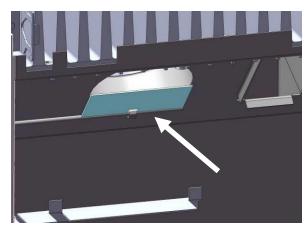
Restrictor Fully Closed Detail (baffle removed for clarity)
